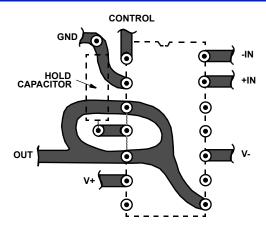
GUARD RING LAYOUT (BOTTOM VIEW)
